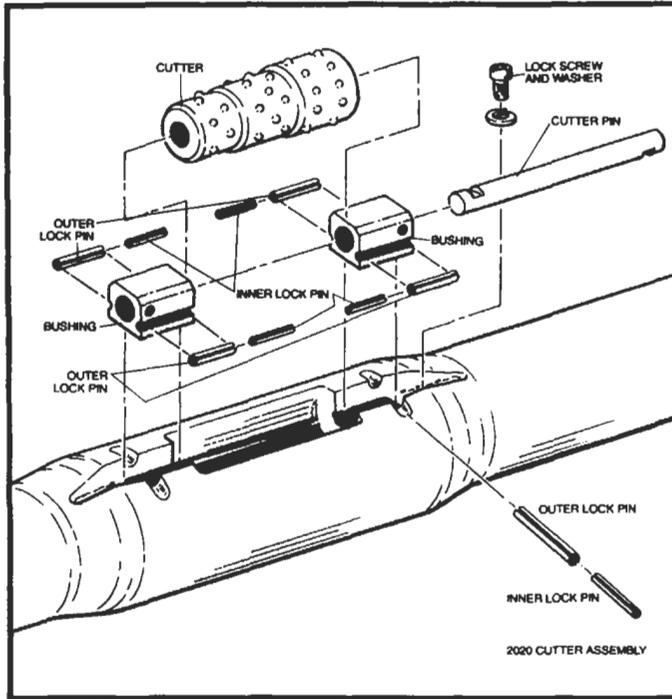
Stabilizer/reamers; various cutters and schematics of cutter assembly. (Courtesy Masco Tech Inc.)
